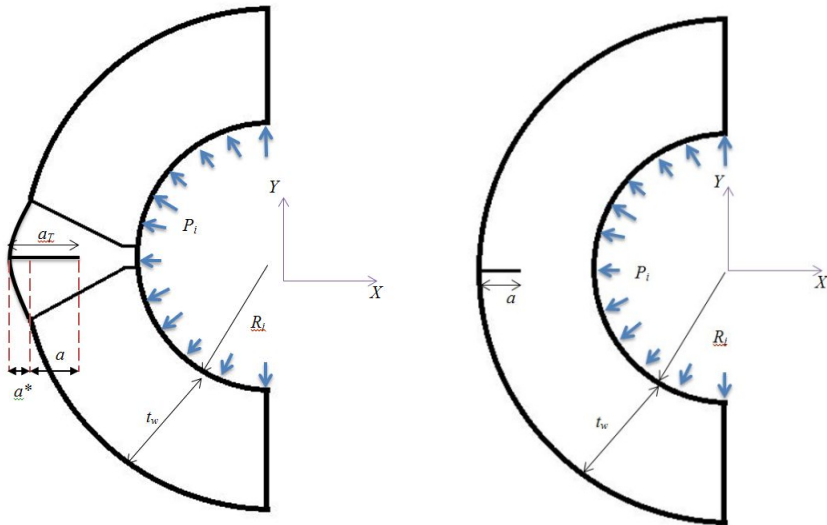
Single edge external surface crack in (a) longitudinal butt-welded joint thick-wall cylinder, (b) non-welded thick-wall cylinder
